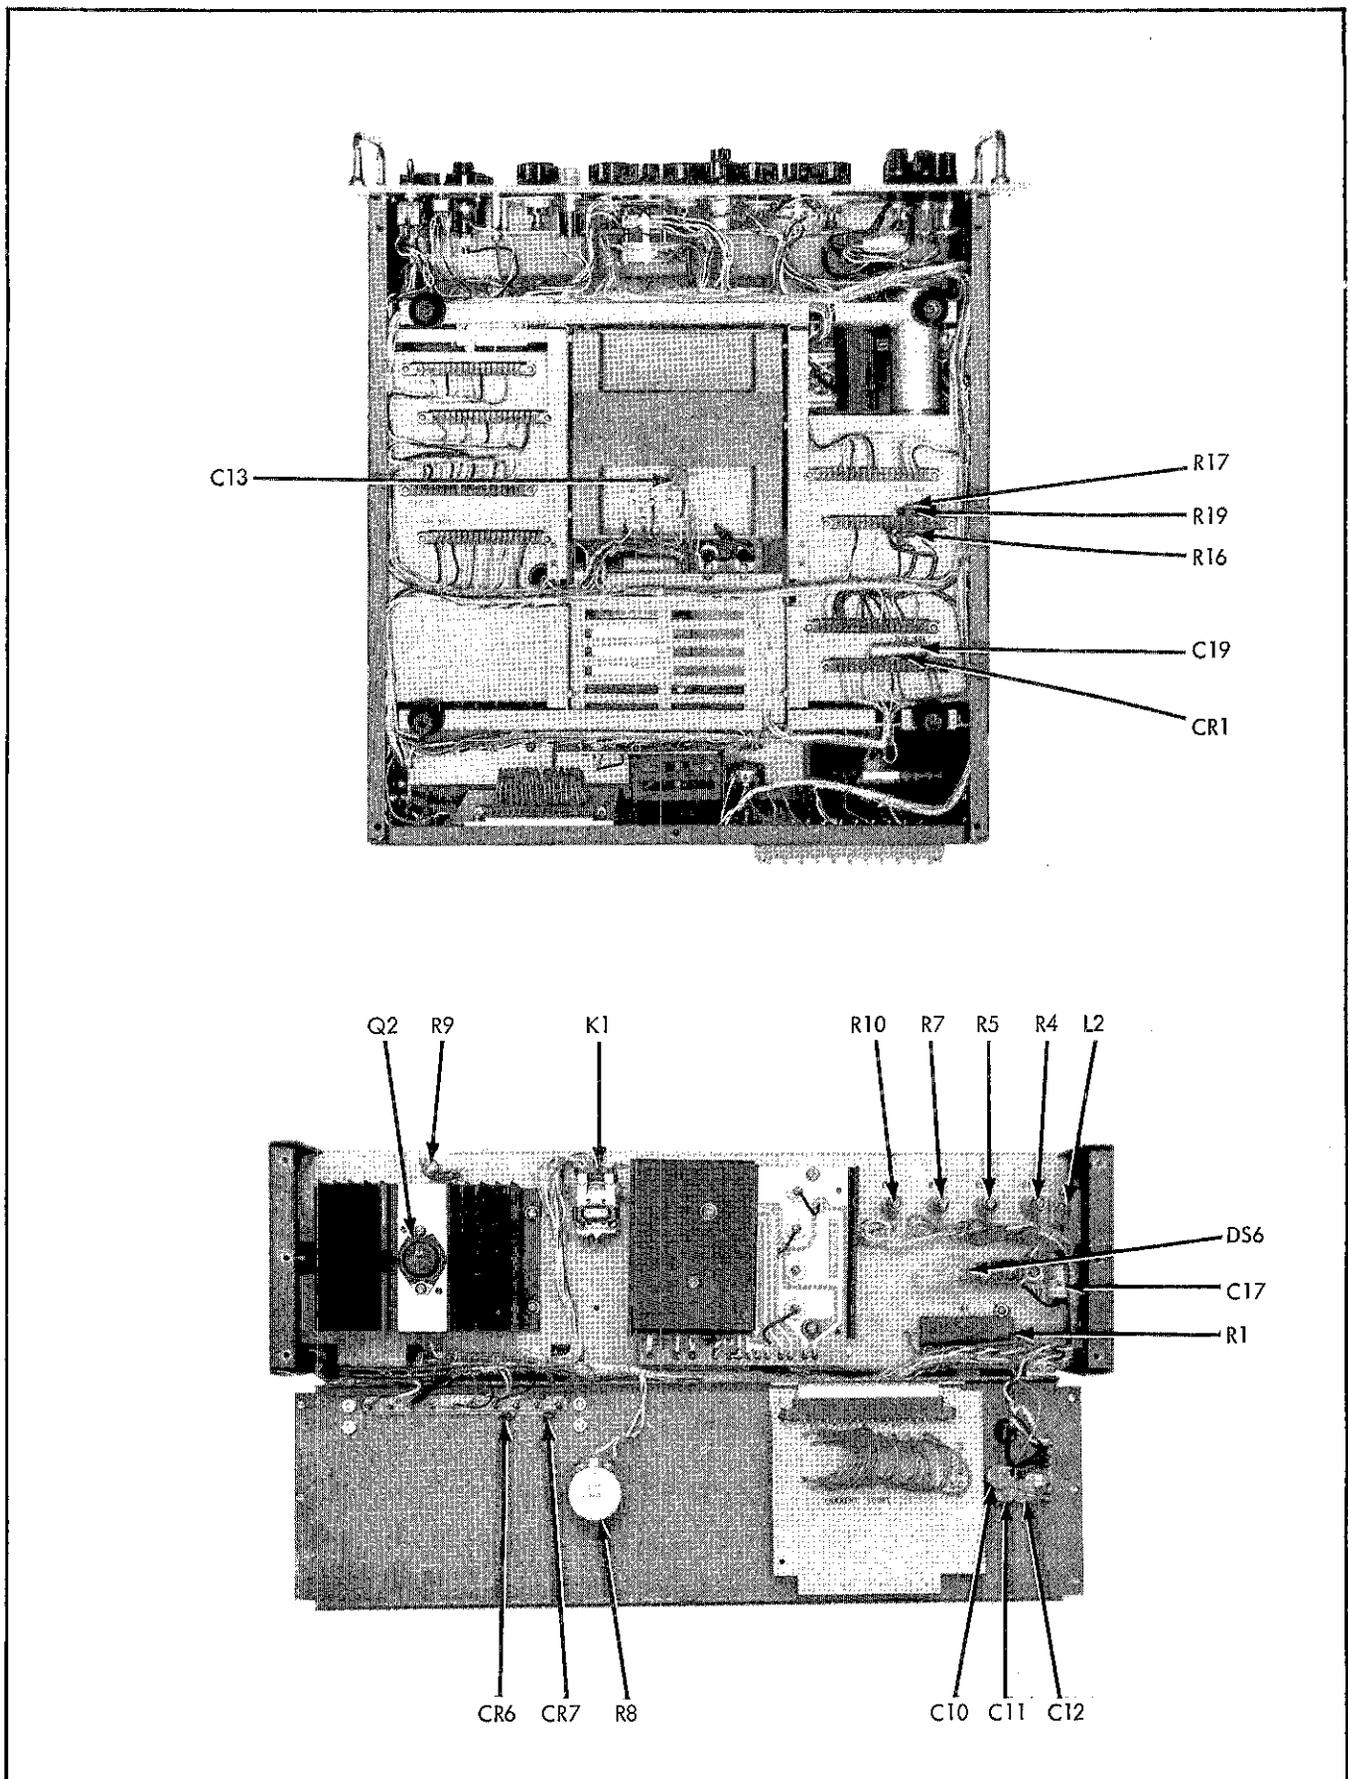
FINAL ASSEMBLY (sheet 2 of 2)
